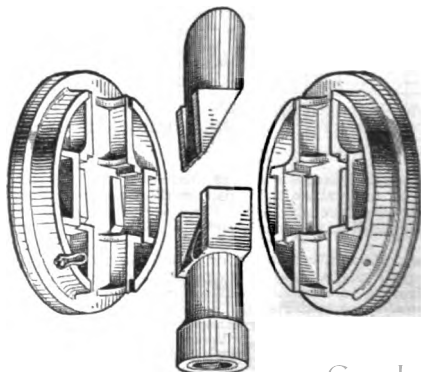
Style of Gates and Wedges for Double Gate Valves.
